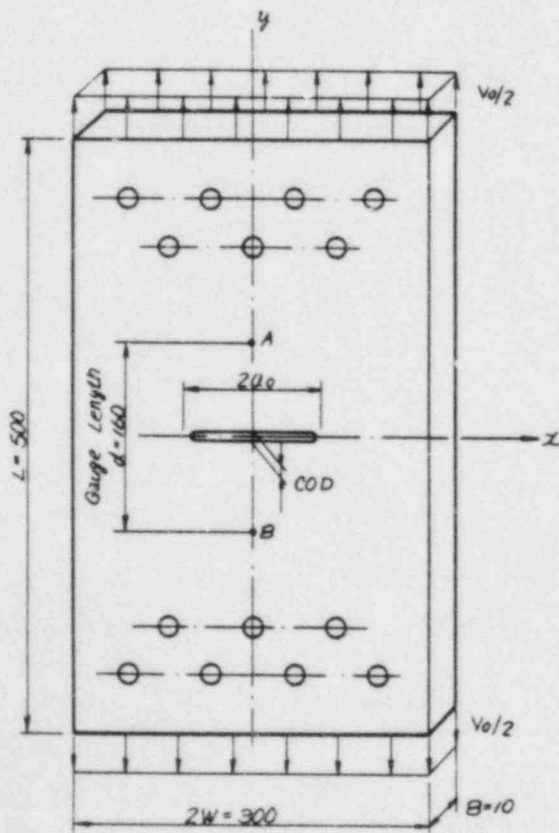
Center Cracked Plate Subjected to Tension (Dimensions in mm)
